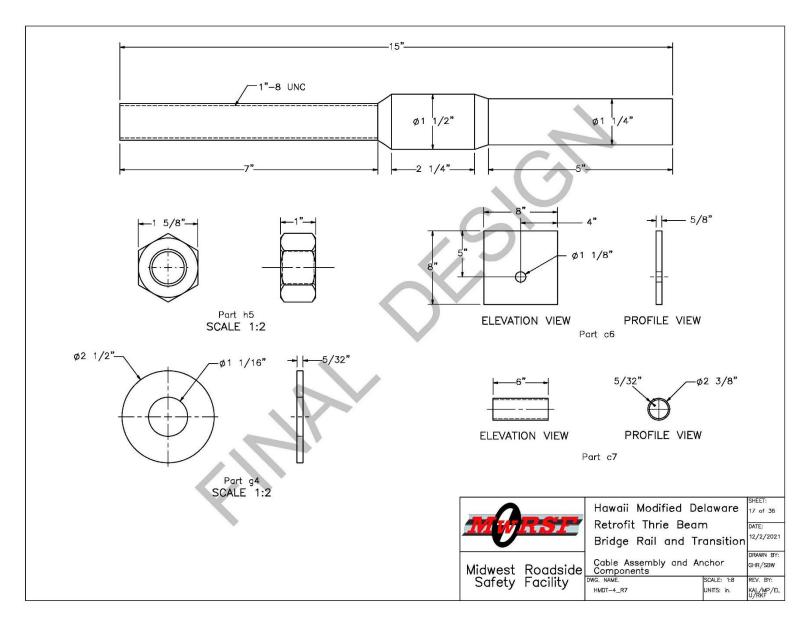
Cable Assembly and Anchor Components, Test No. HMDT-4
